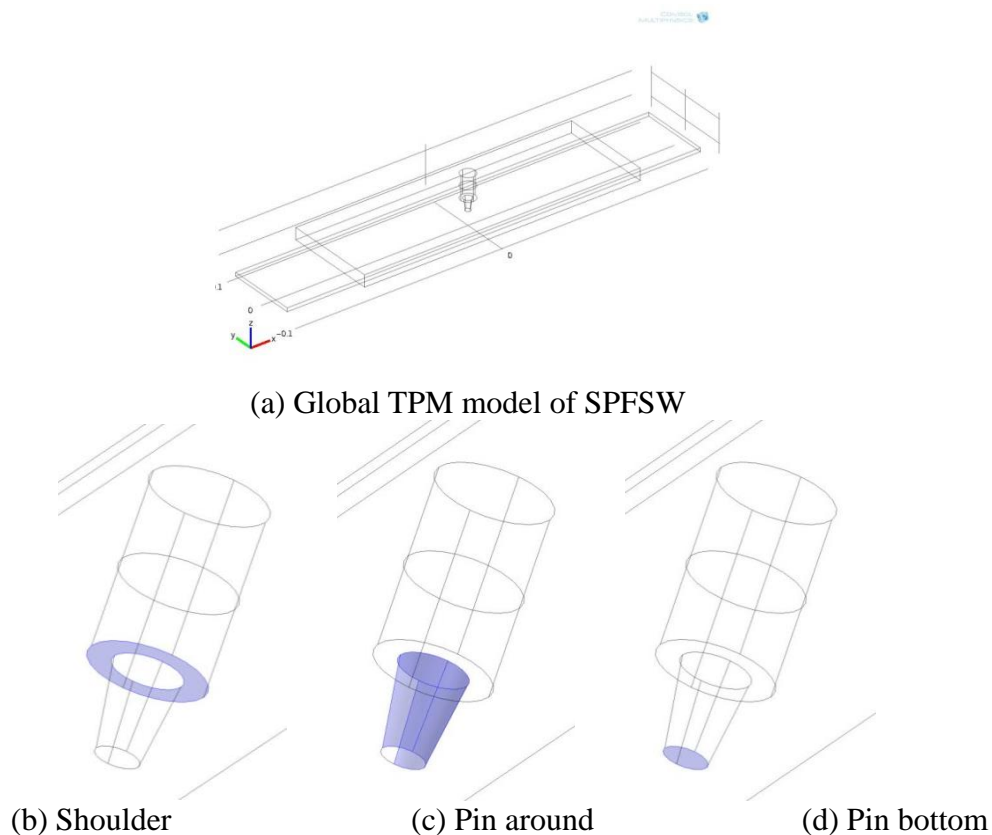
Typical TPM model for SPFSW: (a) global TPM model, interface of (b) WP and tool shoulder, (c) WP and tool pin around, and (d) WP and tool pin bottom. Heat generation terms are applied in shoulder/WP and pin/WP interfaces (blue areas)
